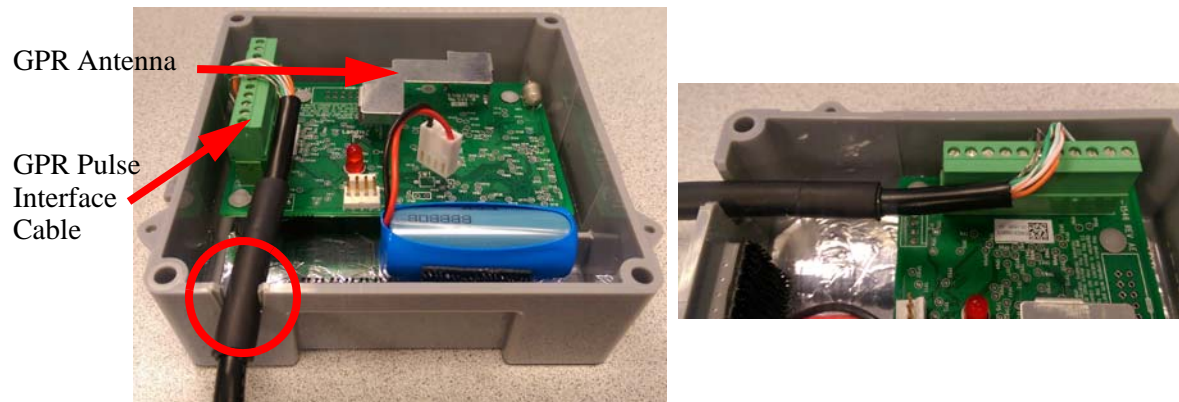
Arrange Cables As Shown Before Installing the GPR Cover
